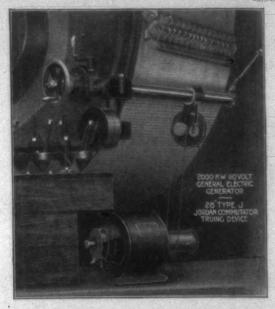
Commutator Truing Device. A grinding wheel driven by an electric motor is moved across the face of the commutator as it is
